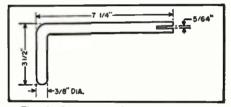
Dimensions for α bending tool useful for entering inaccessible places in the tape recorder for slight adjustments.
